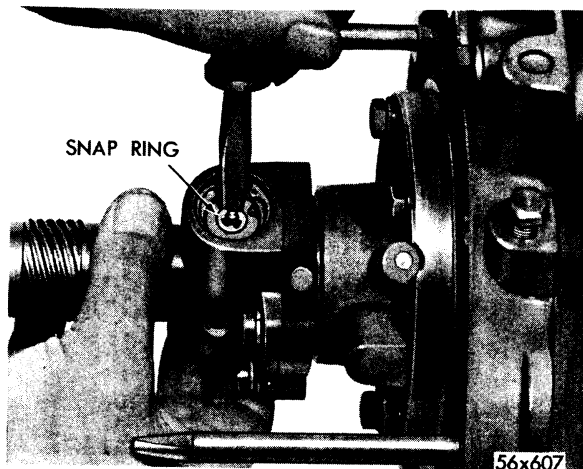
Removal and Installation of Governor Valve Shaft Snap Ring
